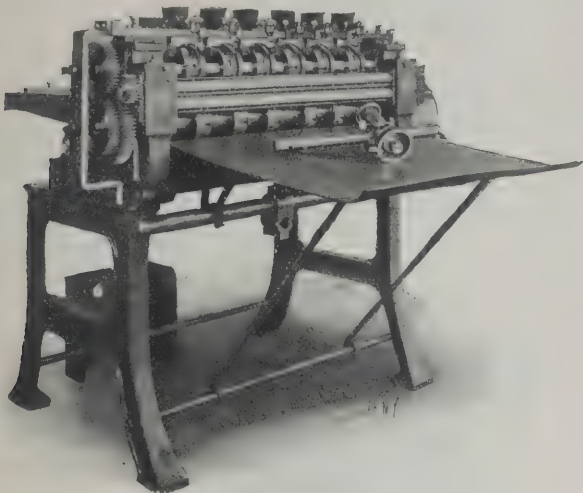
Slitting Rolls with Double Cutting Edges and Self-contained Grinding Attachment
